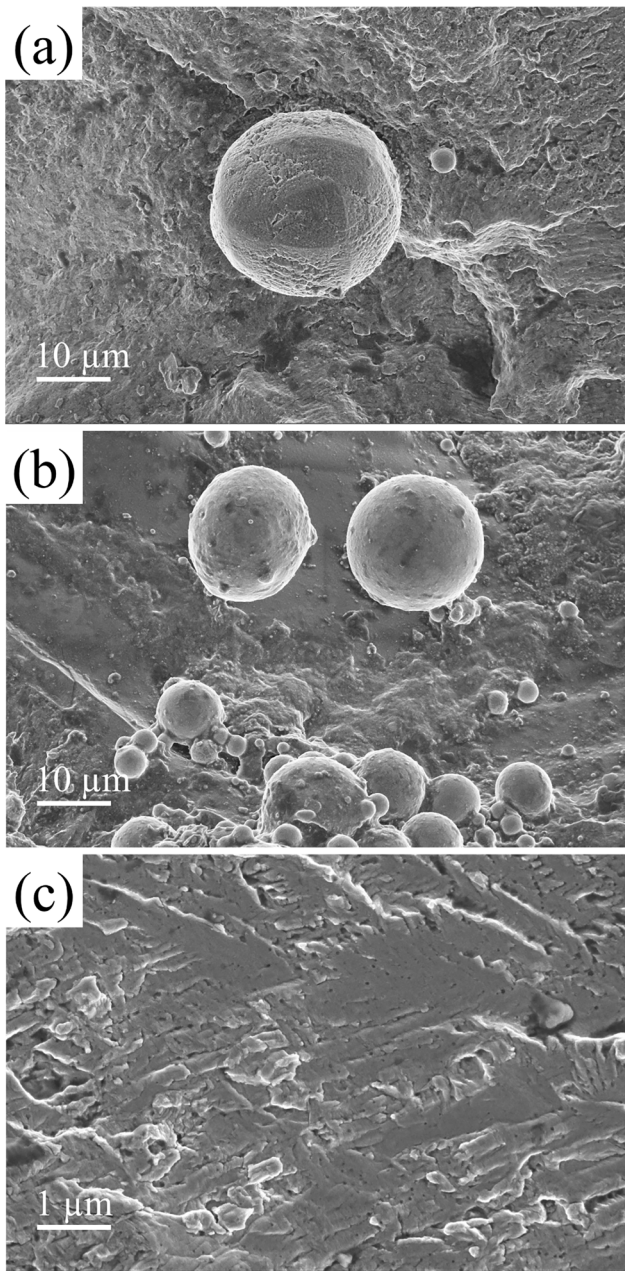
Defects of fatigue fracture: (a) pores; (b) spherical region; (c) cracks propagation.
